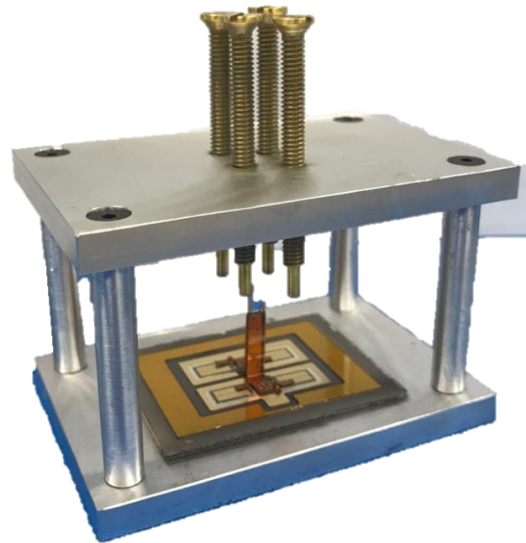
Fixture for use during curing of the flexible PCB connection
